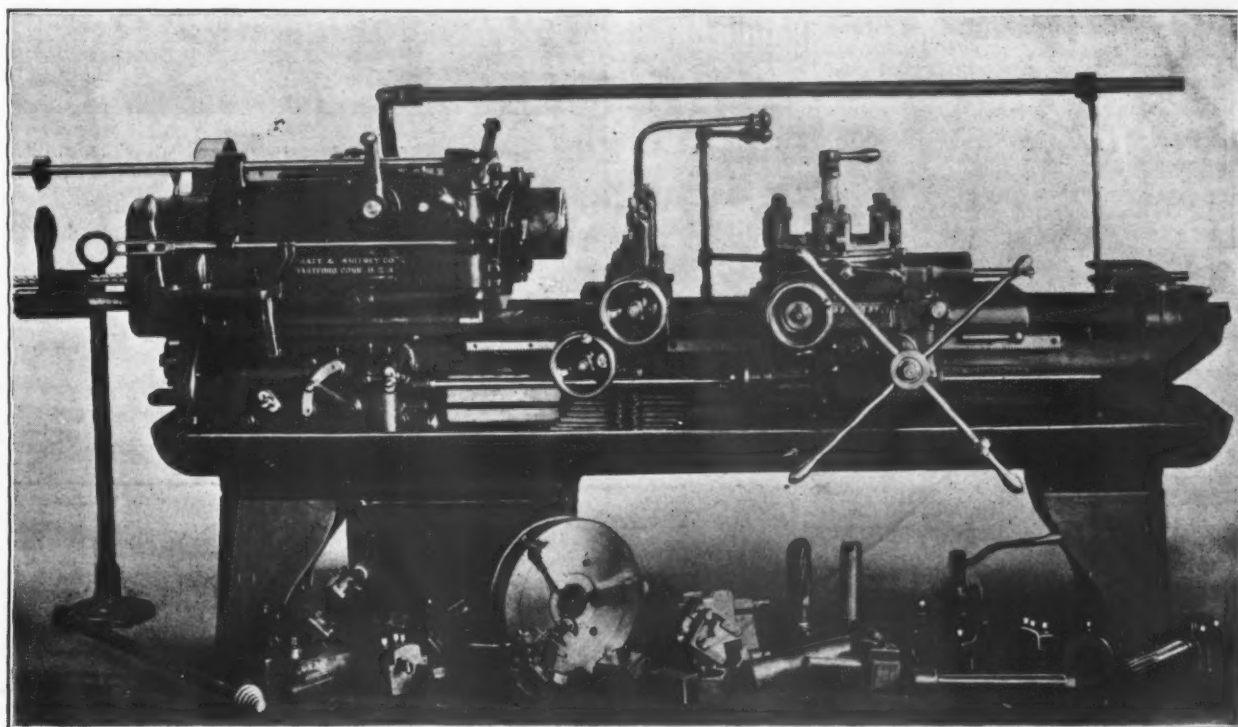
The New $2\frac{1}{2}$ x 26 In. Turret Lathe Built by the Pratt & Whitney Company, Hartford, Conn.
